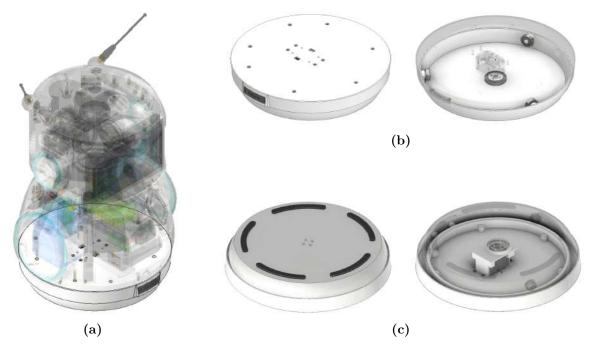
Robot base sub-assembly: (a) Location in the main assembly, (b) Top view detail, (c) Bottom view detail.
